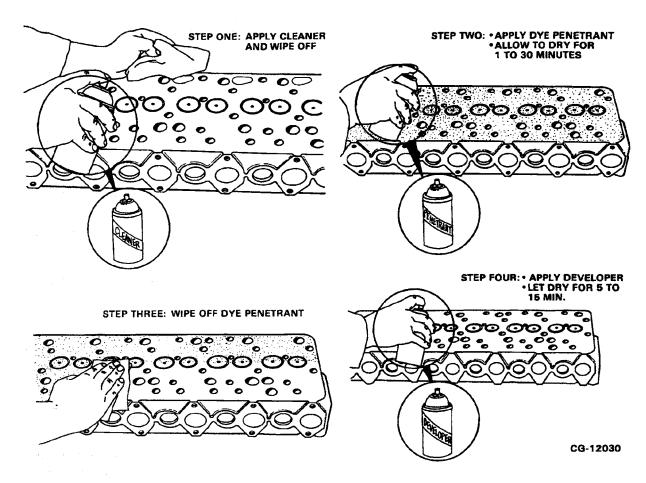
Inspect for Cracks Using Dye Penetrant Method
